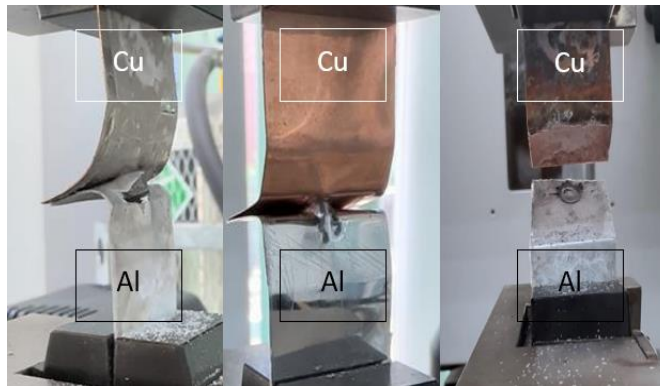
Failure modes observation of workpieces which connected by (a) bolt, (b) rivet, and (c) weld
